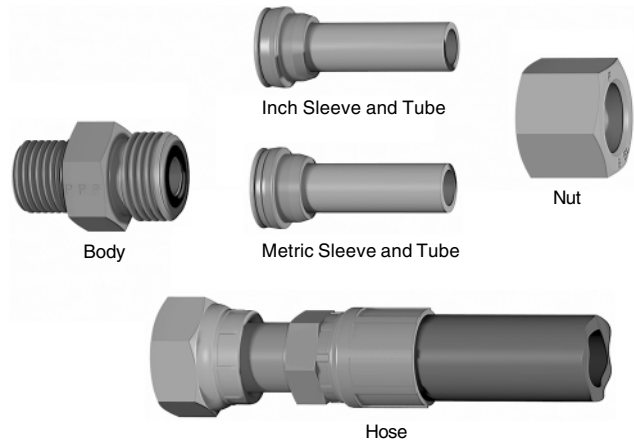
Seal-Lok Works with Inch or Metric Tube and Hose
